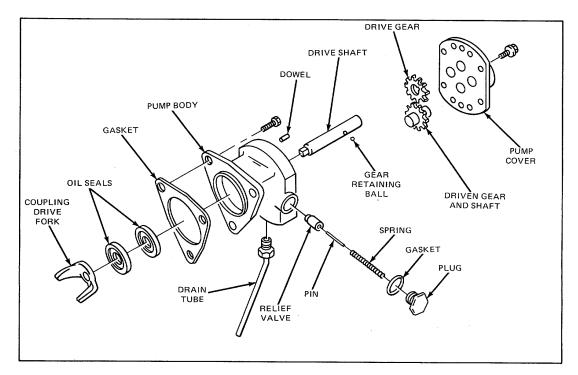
Fuel Pump Details and Relative Location of Parts (Right Hand Pump Shown)
